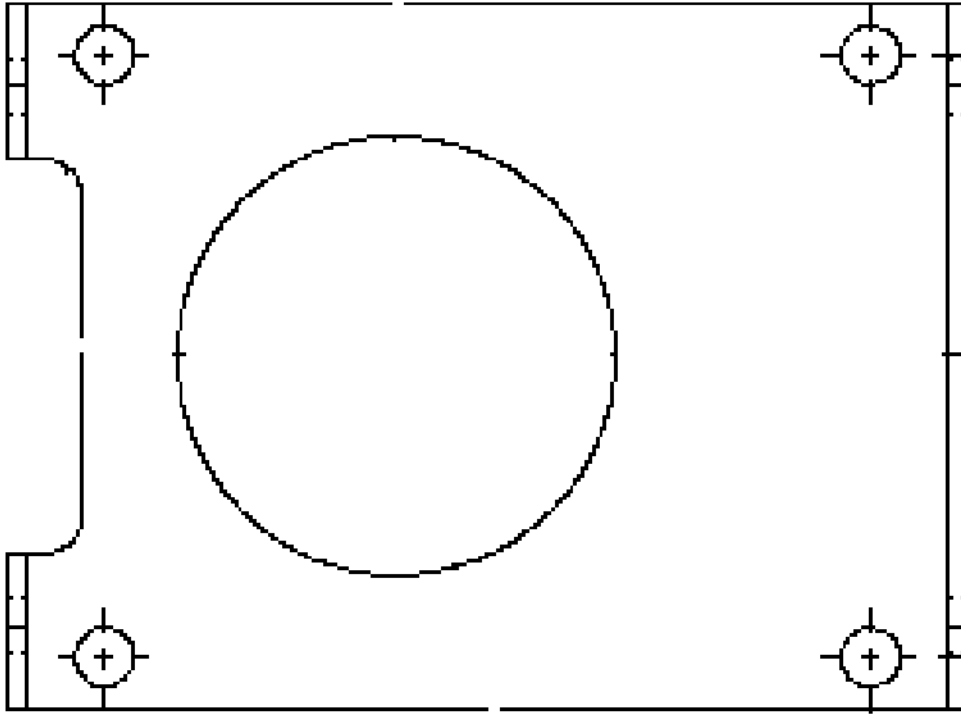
Gearbox Mount Bracket 375040 (2)
